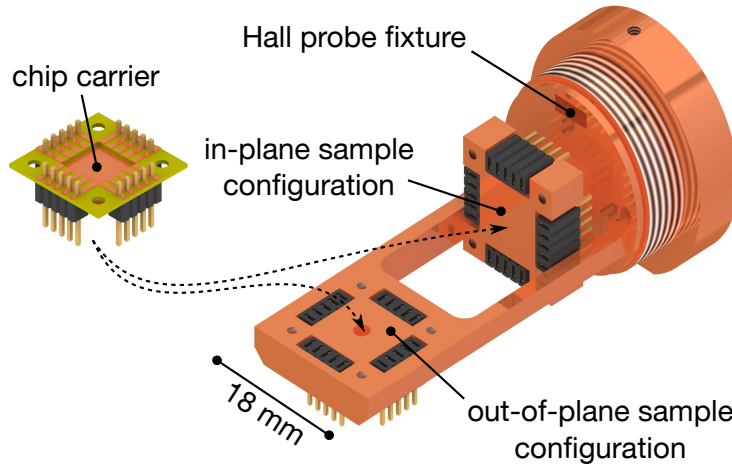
Chip carrier and sample holder for use in the Halbach benchtop setup. Parts of the CAD model were kindly provided by Mathias Althammer and Thomas Brenninger.
